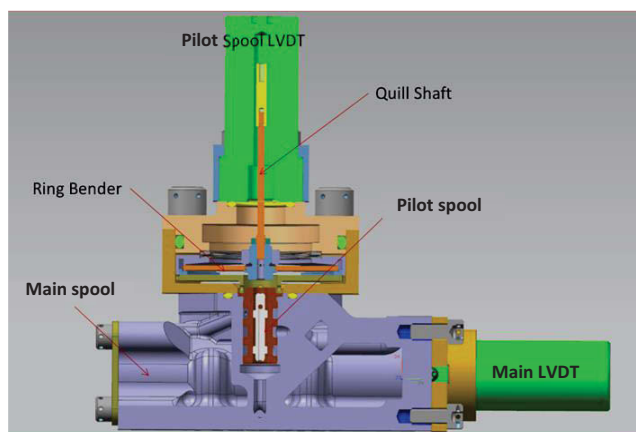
Piezo ring bender actuated pilot spool in two-stage EFB valve /22/
